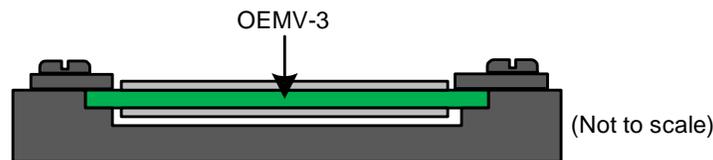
Recommended Mounting – OEMV-3 – Cross-sectional View
